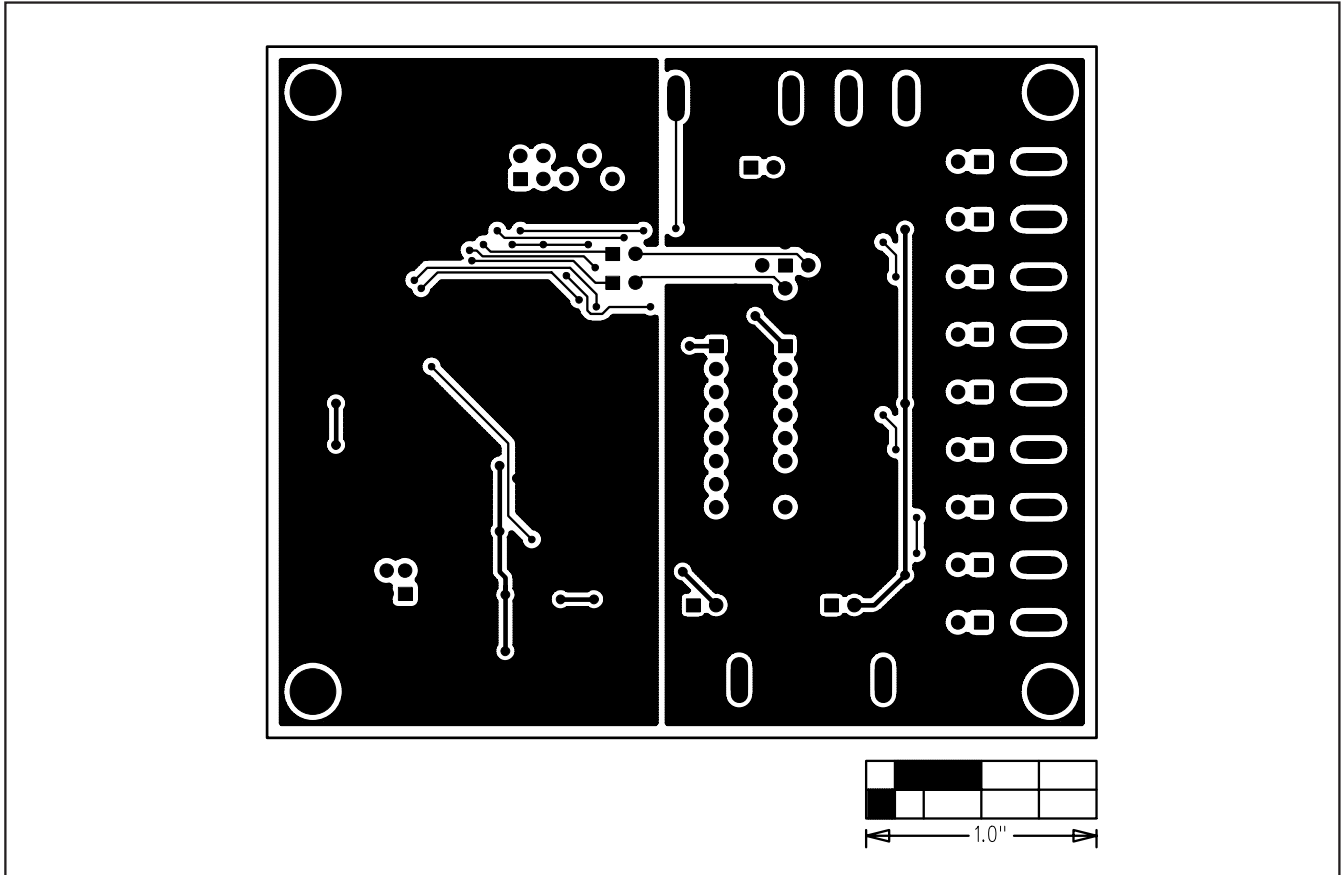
MAX7302 EV Kit PCB Layout—Solder Side
